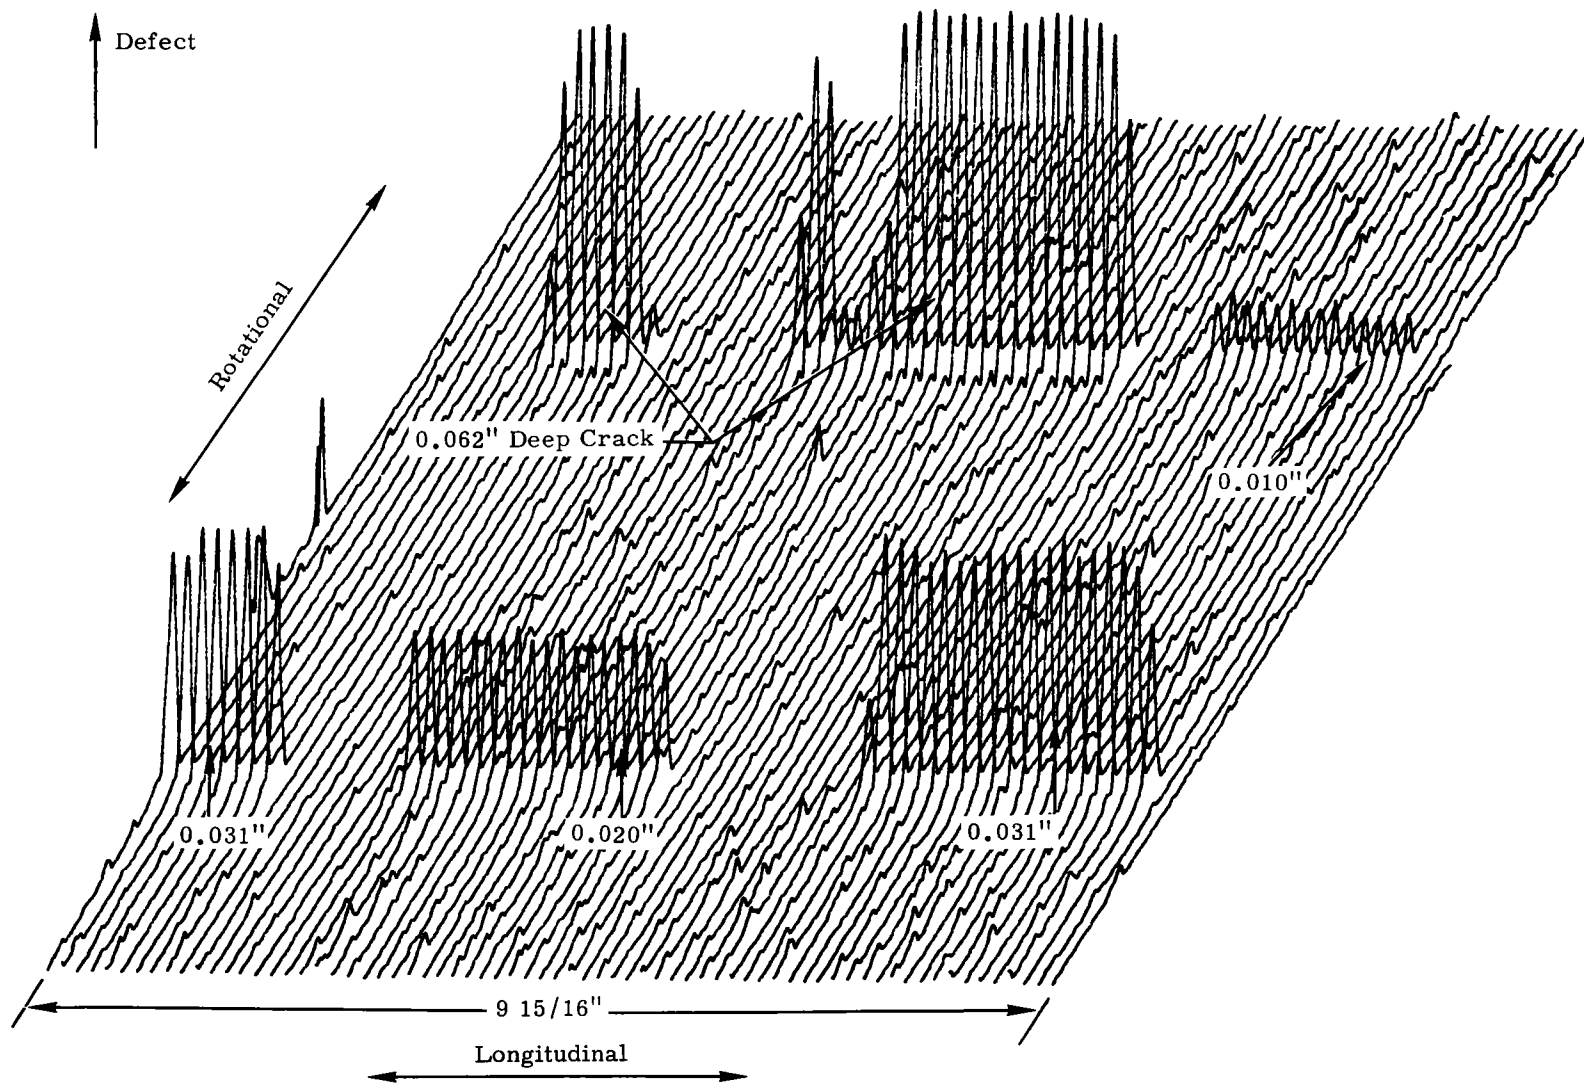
Crack Test, 2 inch Diameter x 1/4 inch Wall SST Tubing
